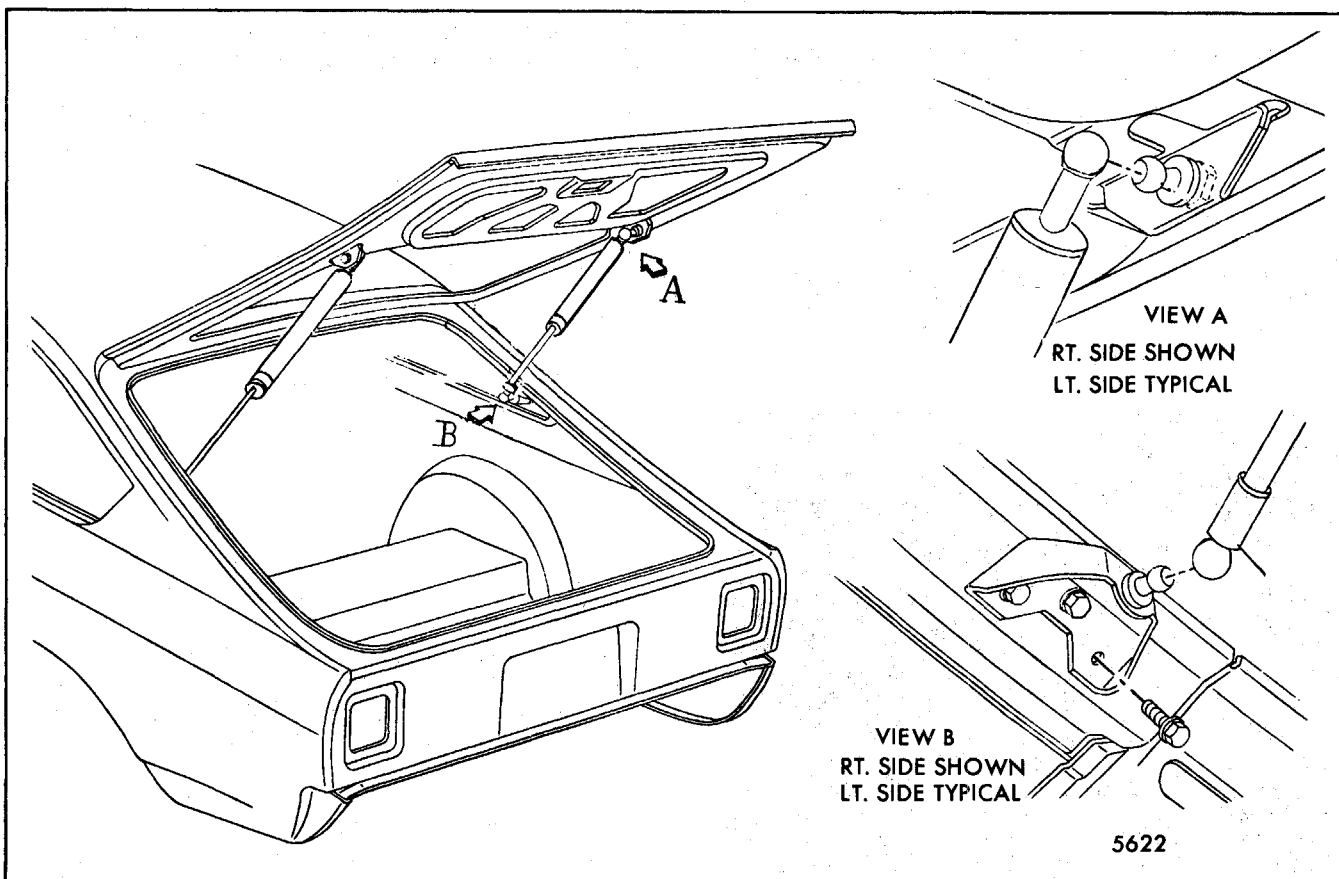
Hatchback Lid Support Assembly Attachment - "H-77" Shown, "H-07" and "X-17" Similar
